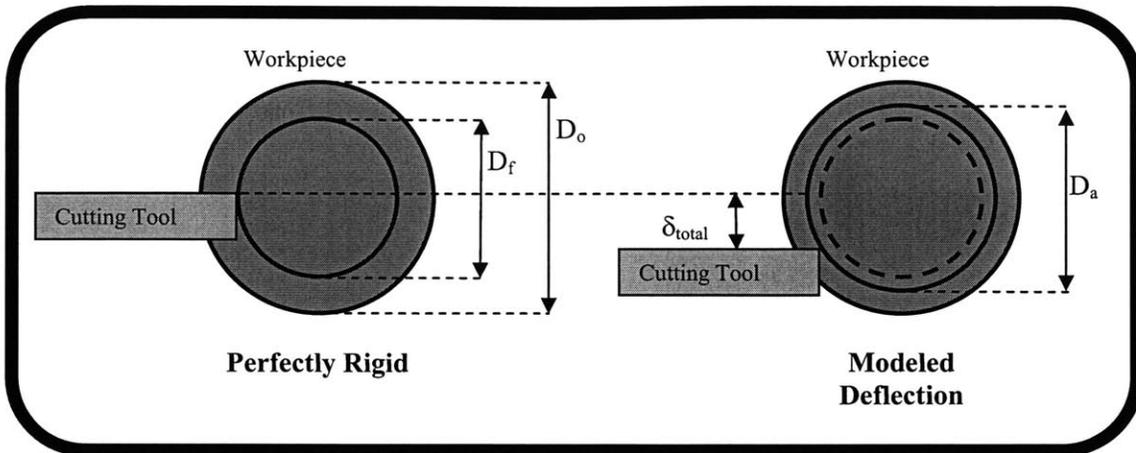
End views of cutting tool and workpiece for ideal and modeled cases
